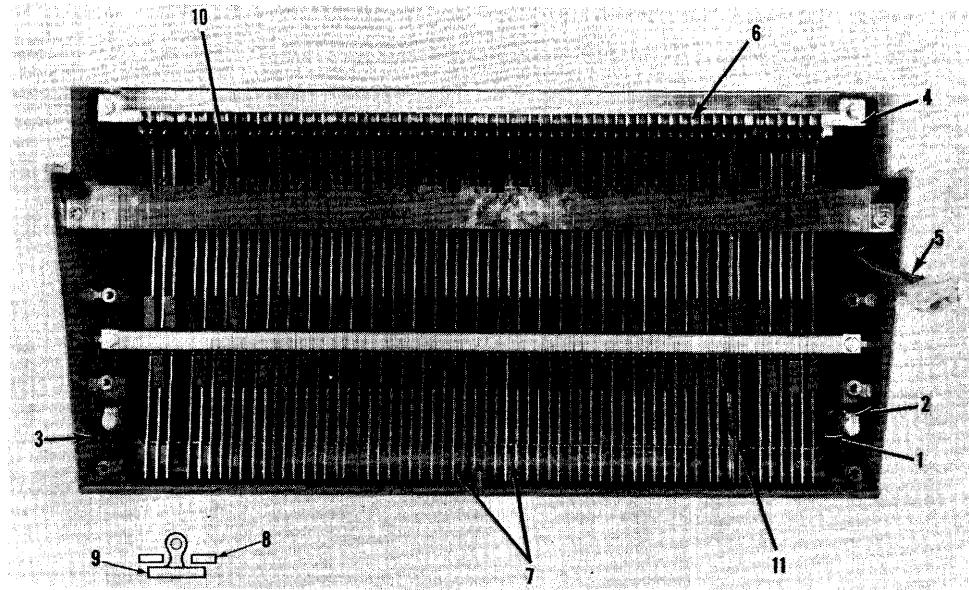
Keyboard Assembly (Top View), TermiNet 300 A or B Printer
